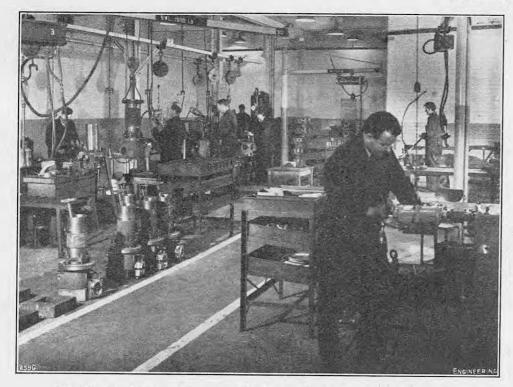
Sub-Assembly Area for Cylinder Heads, Liners and Pistons.
